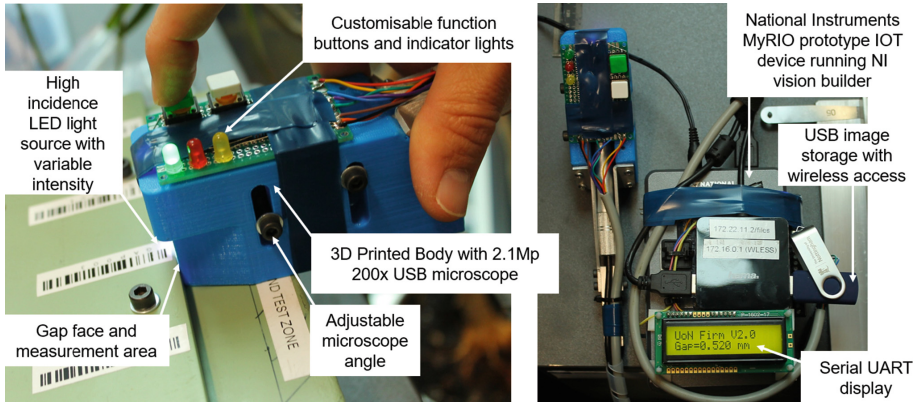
Smart hand tool development prototype for optical aerospace assembly gap measurement
